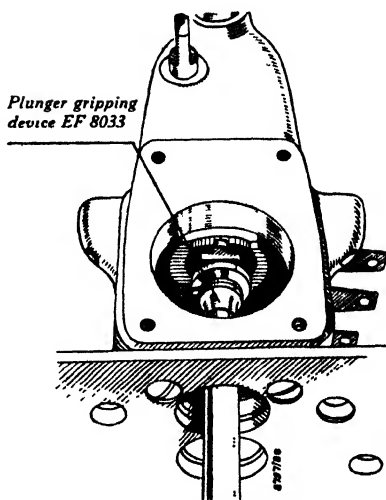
Illustrating method of Inserting Plunger Gripping Device in the Pump.
